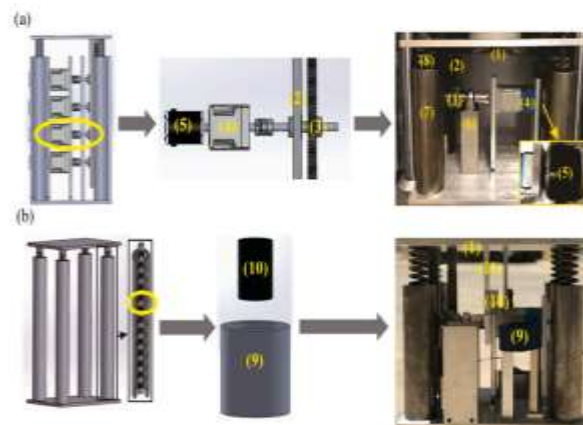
The fabricated prototype (a) R-P mechanism with a Top Plate¹, Rack², Pinion and clutch³, Gearbox⁴, Generator⁵, Pinion Support⁶, Support⁷, Compression Spring⁸. (b) L-GE mechanism with Electrical Coil⁹, Set of Magnets¹⁰, Rod¹¹.
